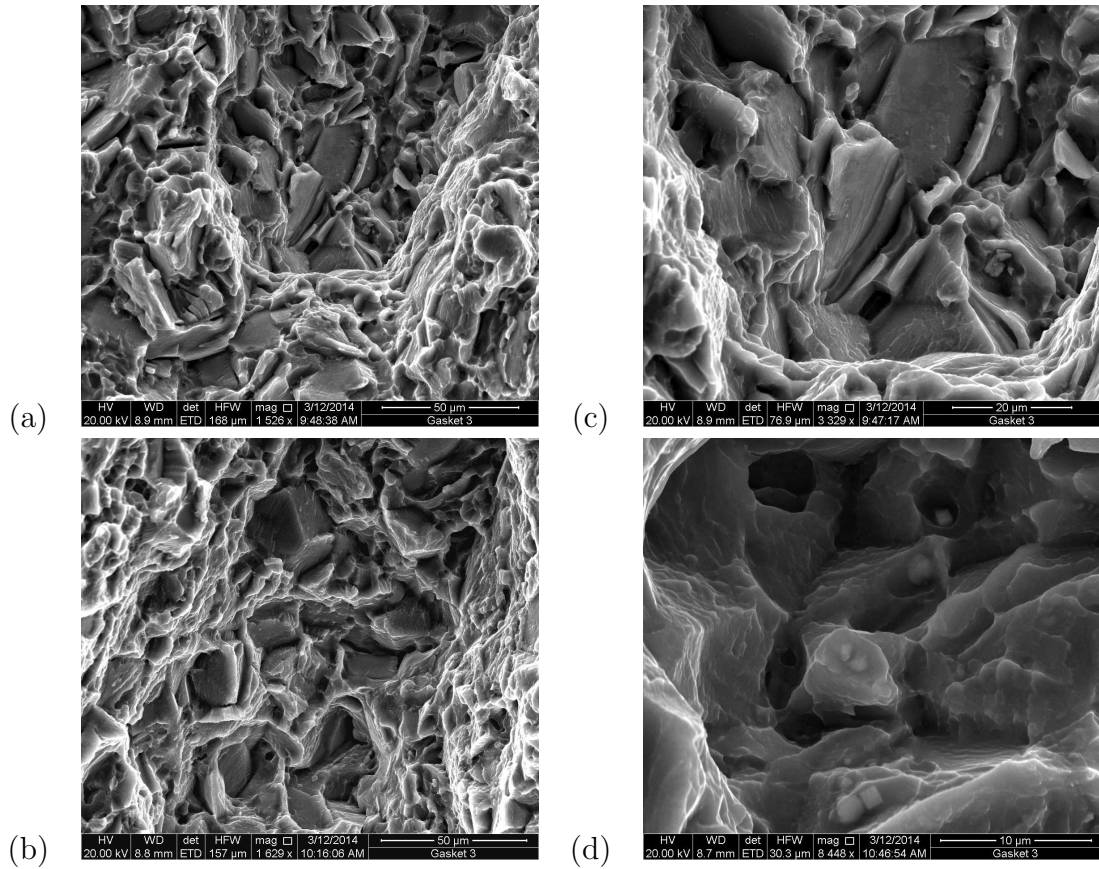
Fracture surface of a WE43-RN10 specimen exhibiting (a)&(c) facets with very smooth surfaces and (b) outline of grains on the fracture surface with smooth boundaries. (d) Second phase particles located at the end of shallow dimples and on smooth facets.
